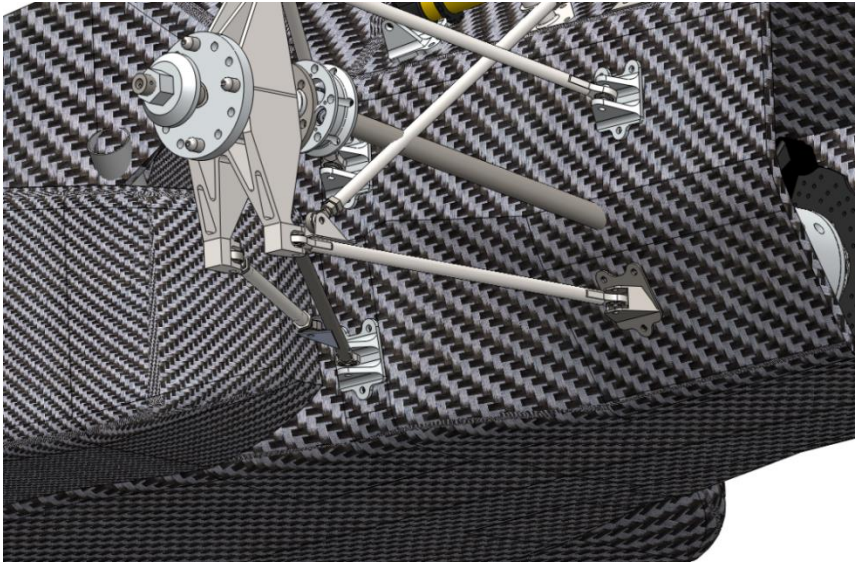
Rear chassis geometry to meet suspension attachment points.
